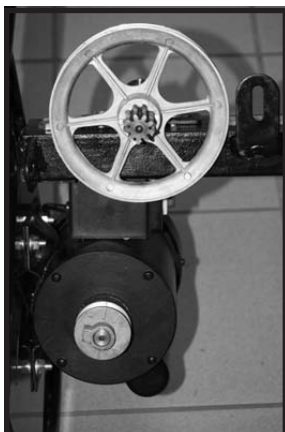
Align motor to mounting slots on left frame and bolt in place.
